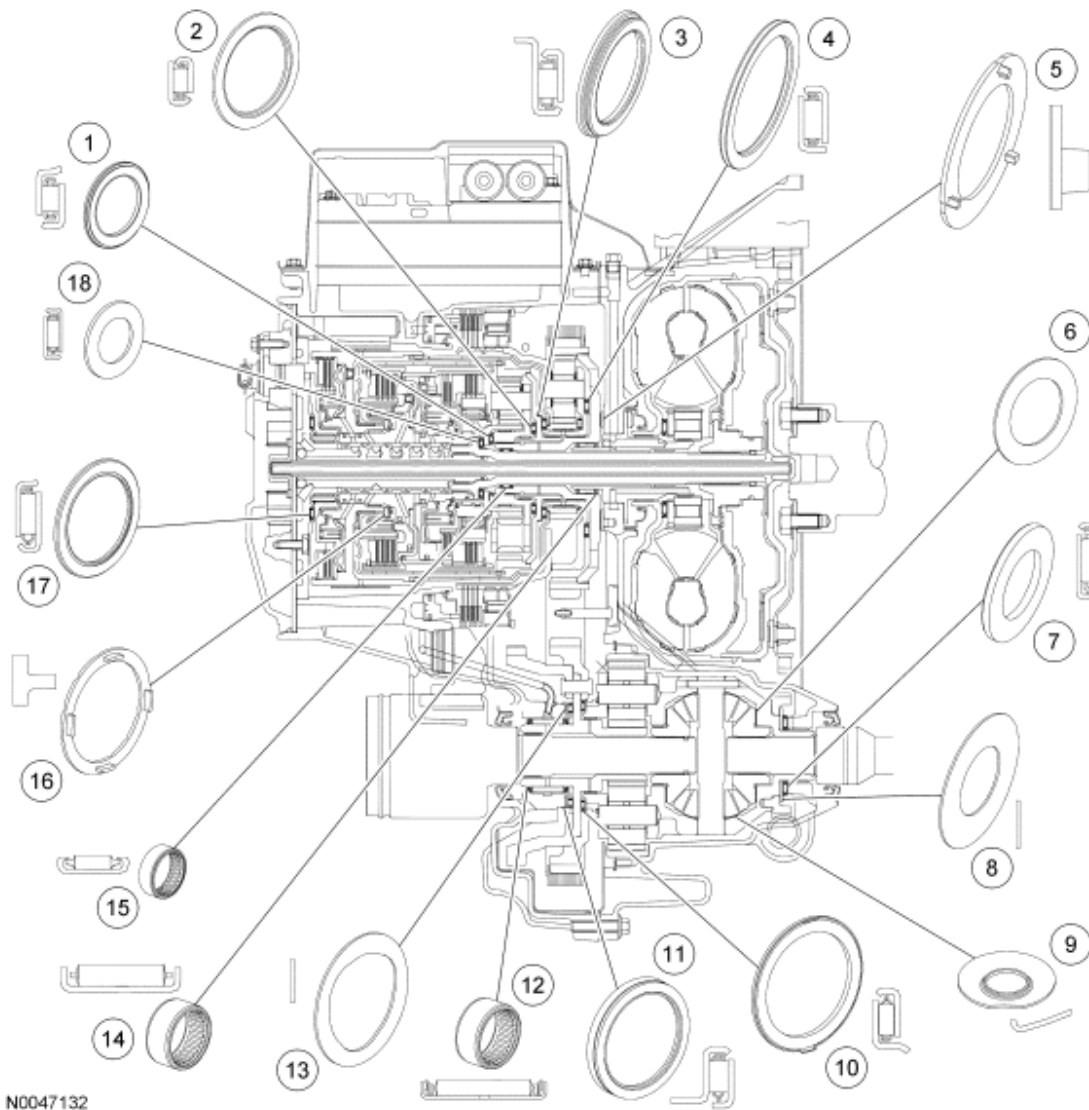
Identifying Bushings, Bearing And Thrust Washer Location
